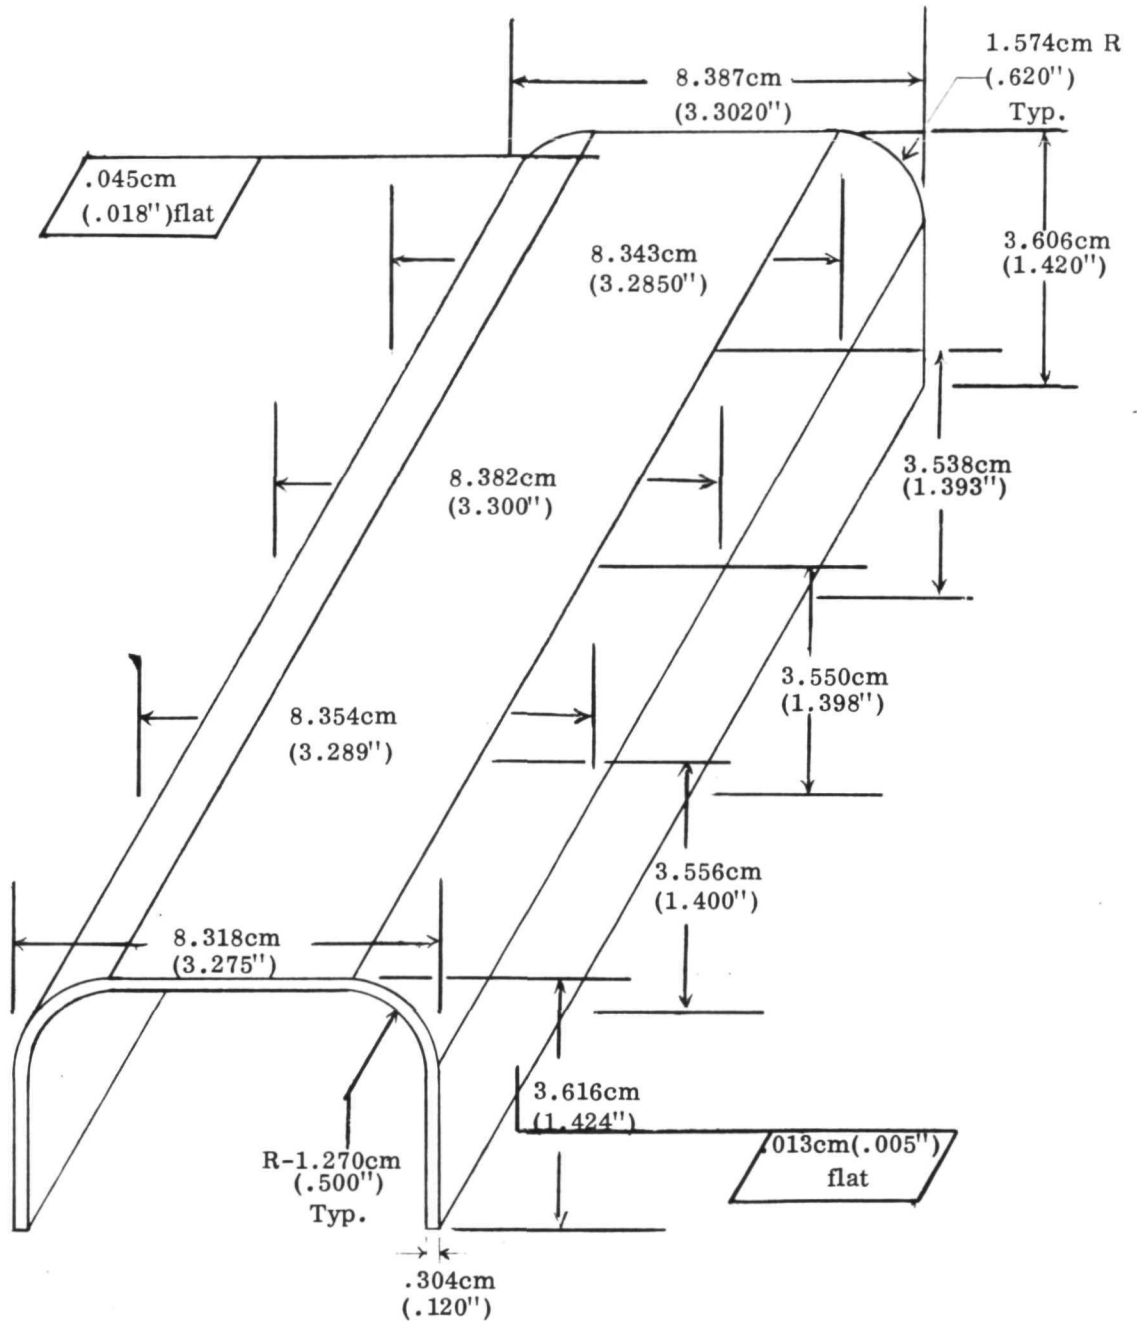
DIMENSIONAL CHECK RESULTS ON A TYPICAL 203cm (80") HOT FORMED BERYLLIUM PANEL STIFFENER
